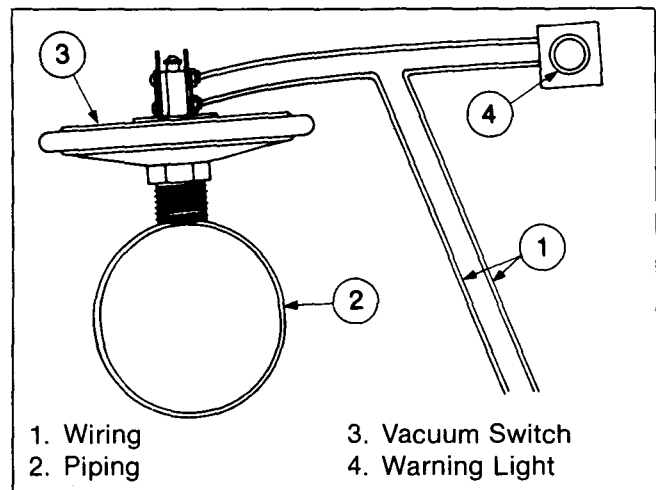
, (N21905). Vacuum switch to check air inlet
